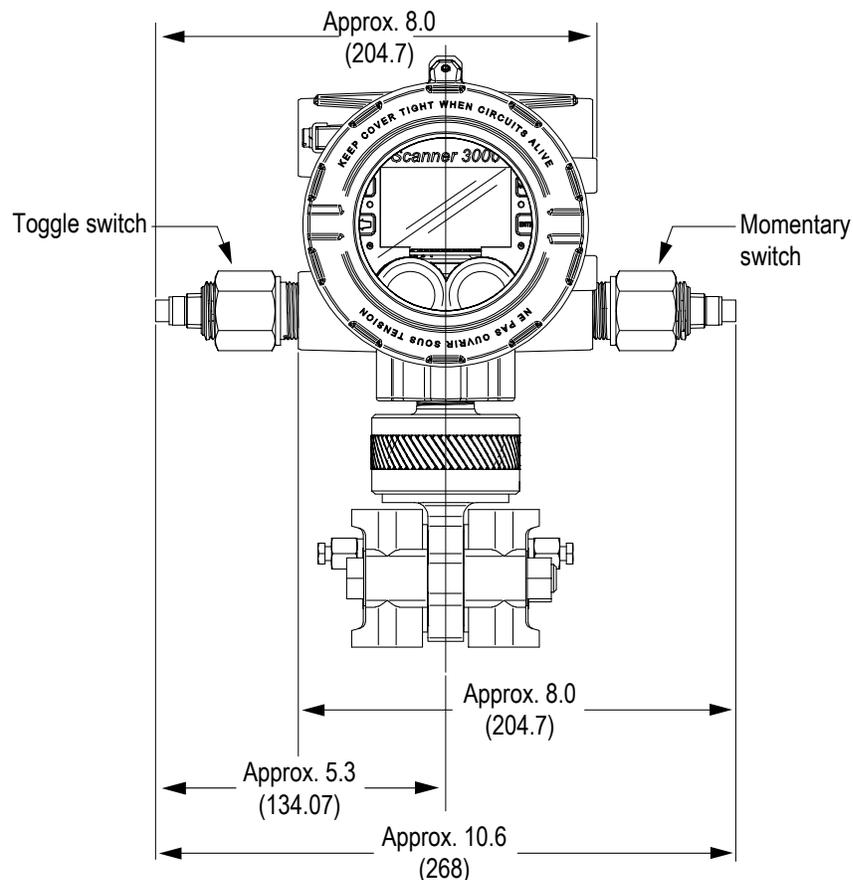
Control switch dimensions in inches (mm); the above diagram shows the default locations of factory-installed switches
